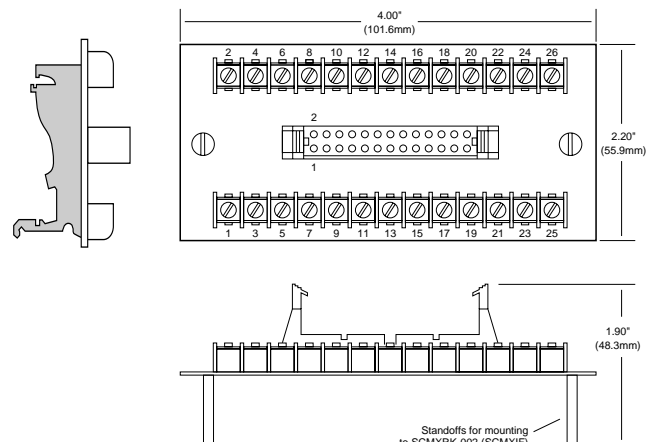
SCMXIF Universal Interface Board Dimensions.
